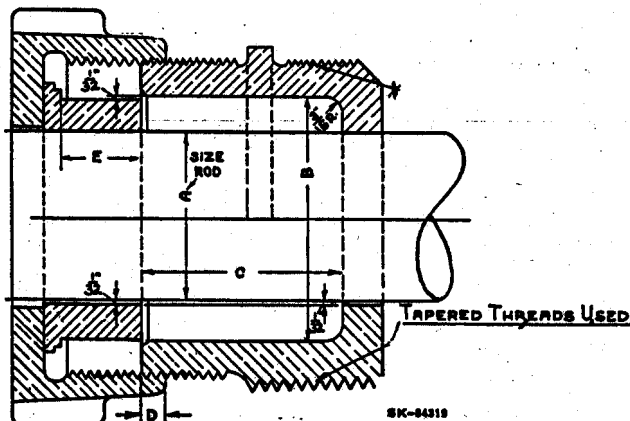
Dimensions for Piston Rod Stuffing Box and Packing.
